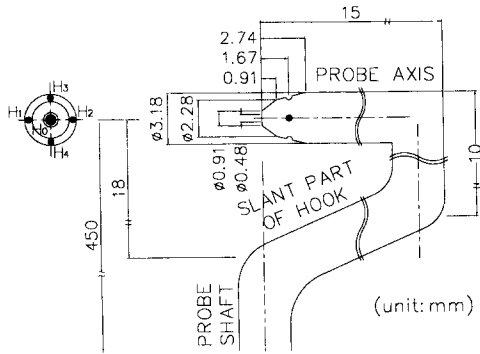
Dimension of the used 5-hole probe (United Sensors, DC-125-18-CD)
